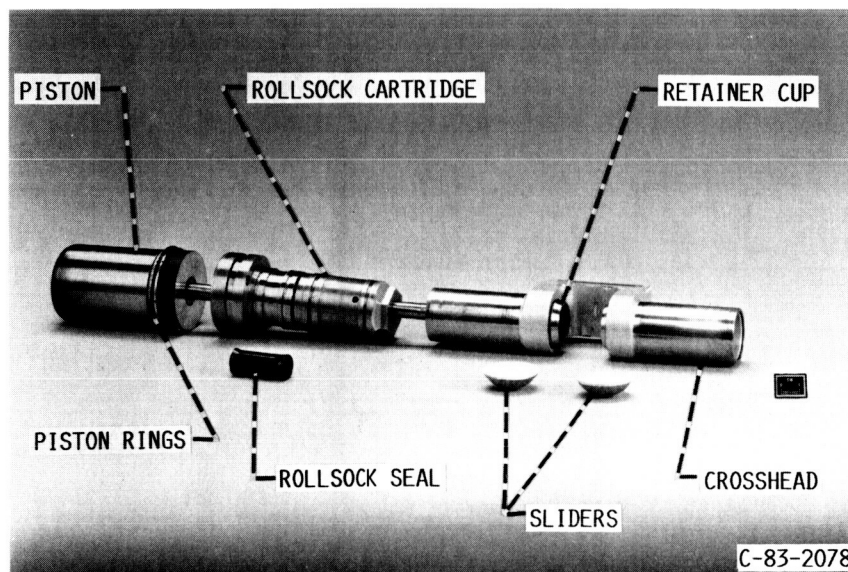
PISTON, ROLL SOCK CARTRIDGE AND SEAL, AND CROSSHEAD WITH SLIDERS.
